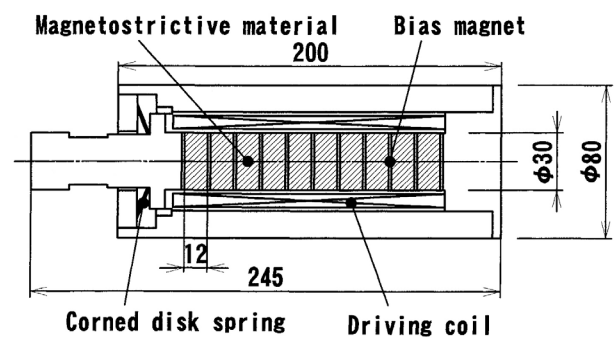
Cross-sectional view of large-sized magnetostrictive actuator
